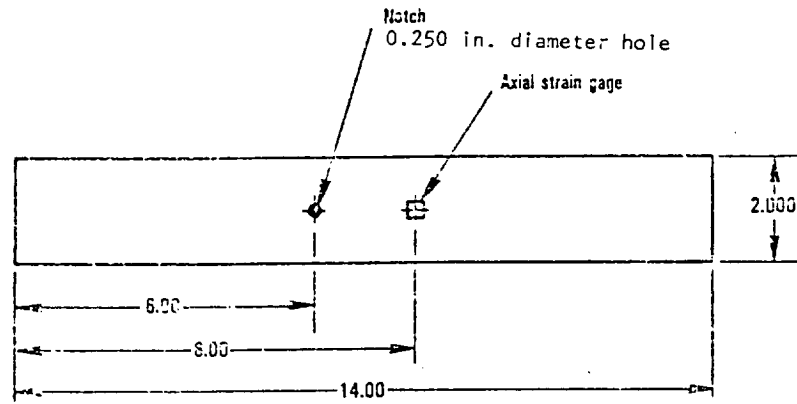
Inplane tension specimen geometry. Only notched specimens had hole.
